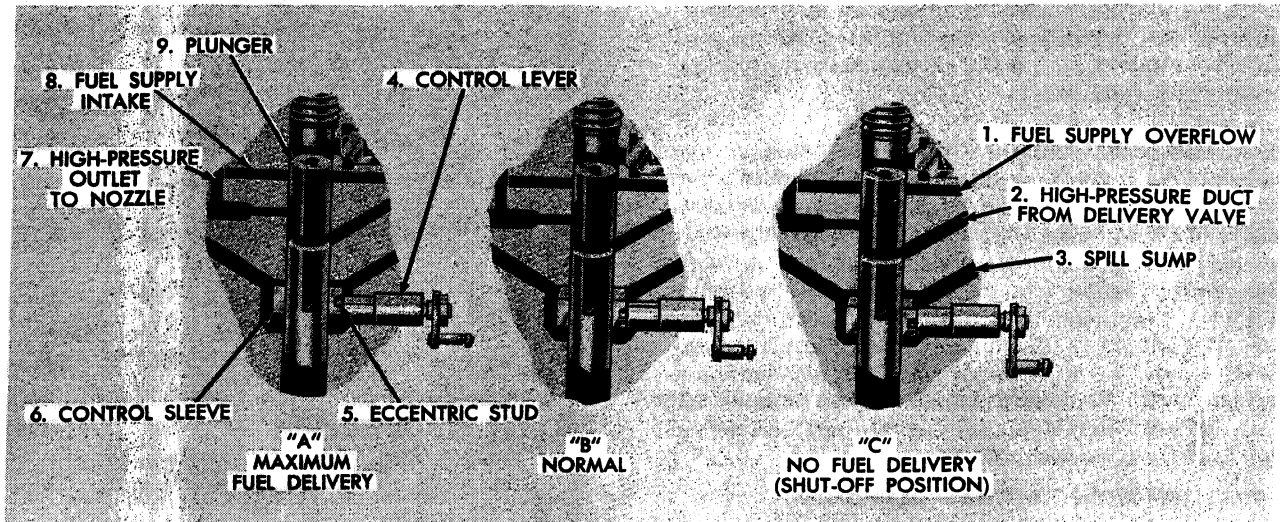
Fuel Injection Pump Control Sleeve Positions (T-29549)
